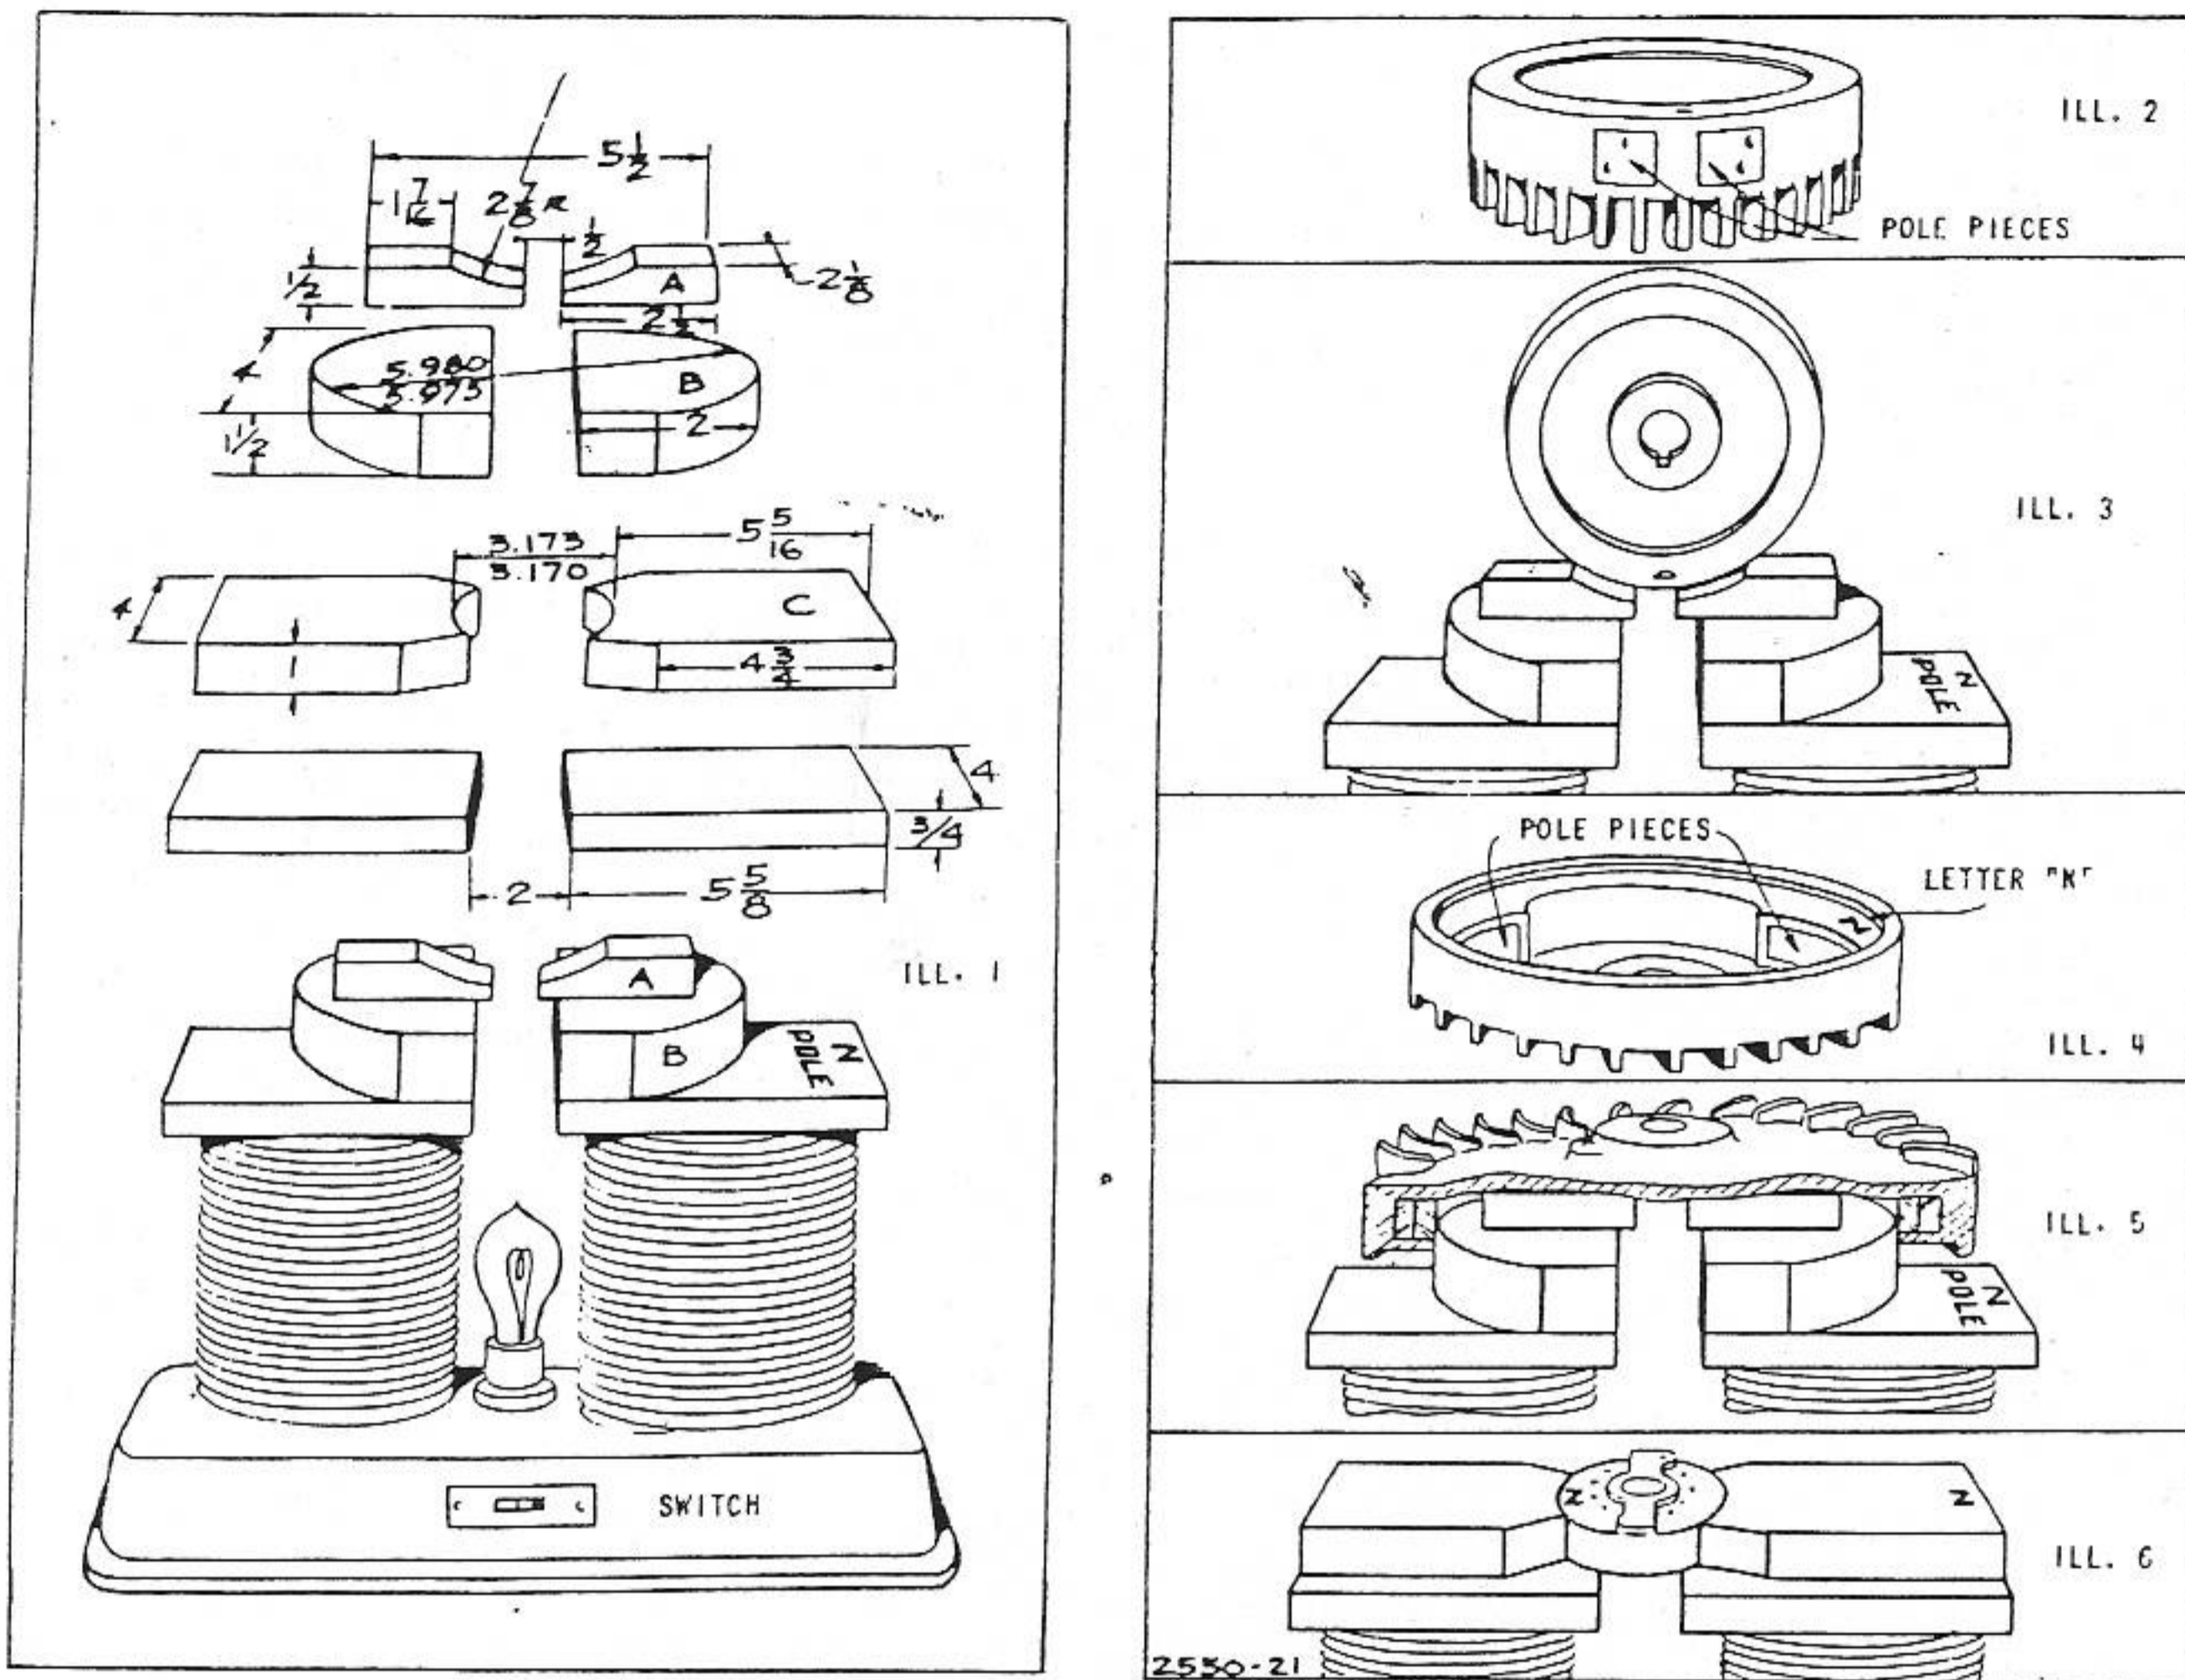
MAGNETIZING FLYWHEELS & ROTORS
